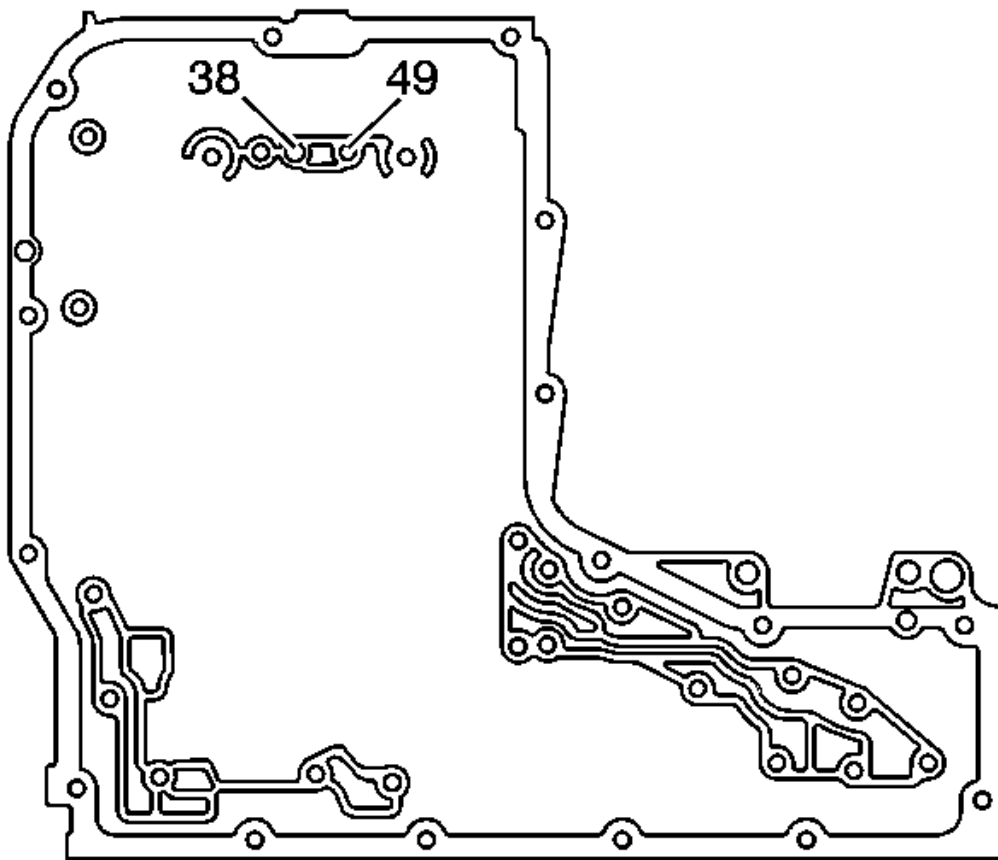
Blowing Air In Passages To Forward Clutch & Coast Clutch
